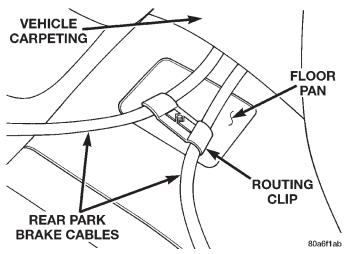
Park Brake Cable Attachment To Floor Pan housing and pull cable straight out of console bracket.
